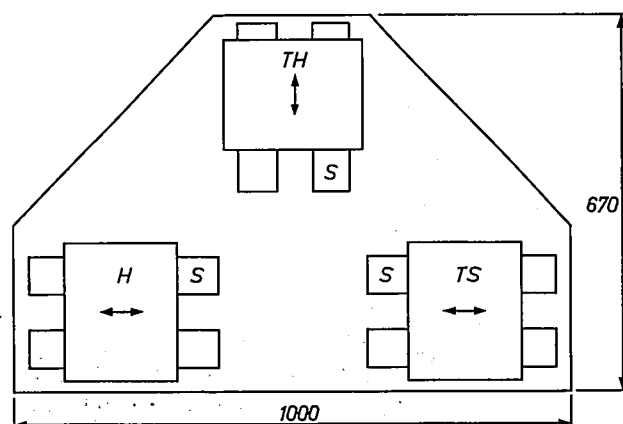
Plan view of the precision lathe. *H* headstock. *TH* toolholder. *TS* tailstock. *S* slideways of the carriages which carry these three main units. The dimensions of the lathe bed are given in millimetres.
